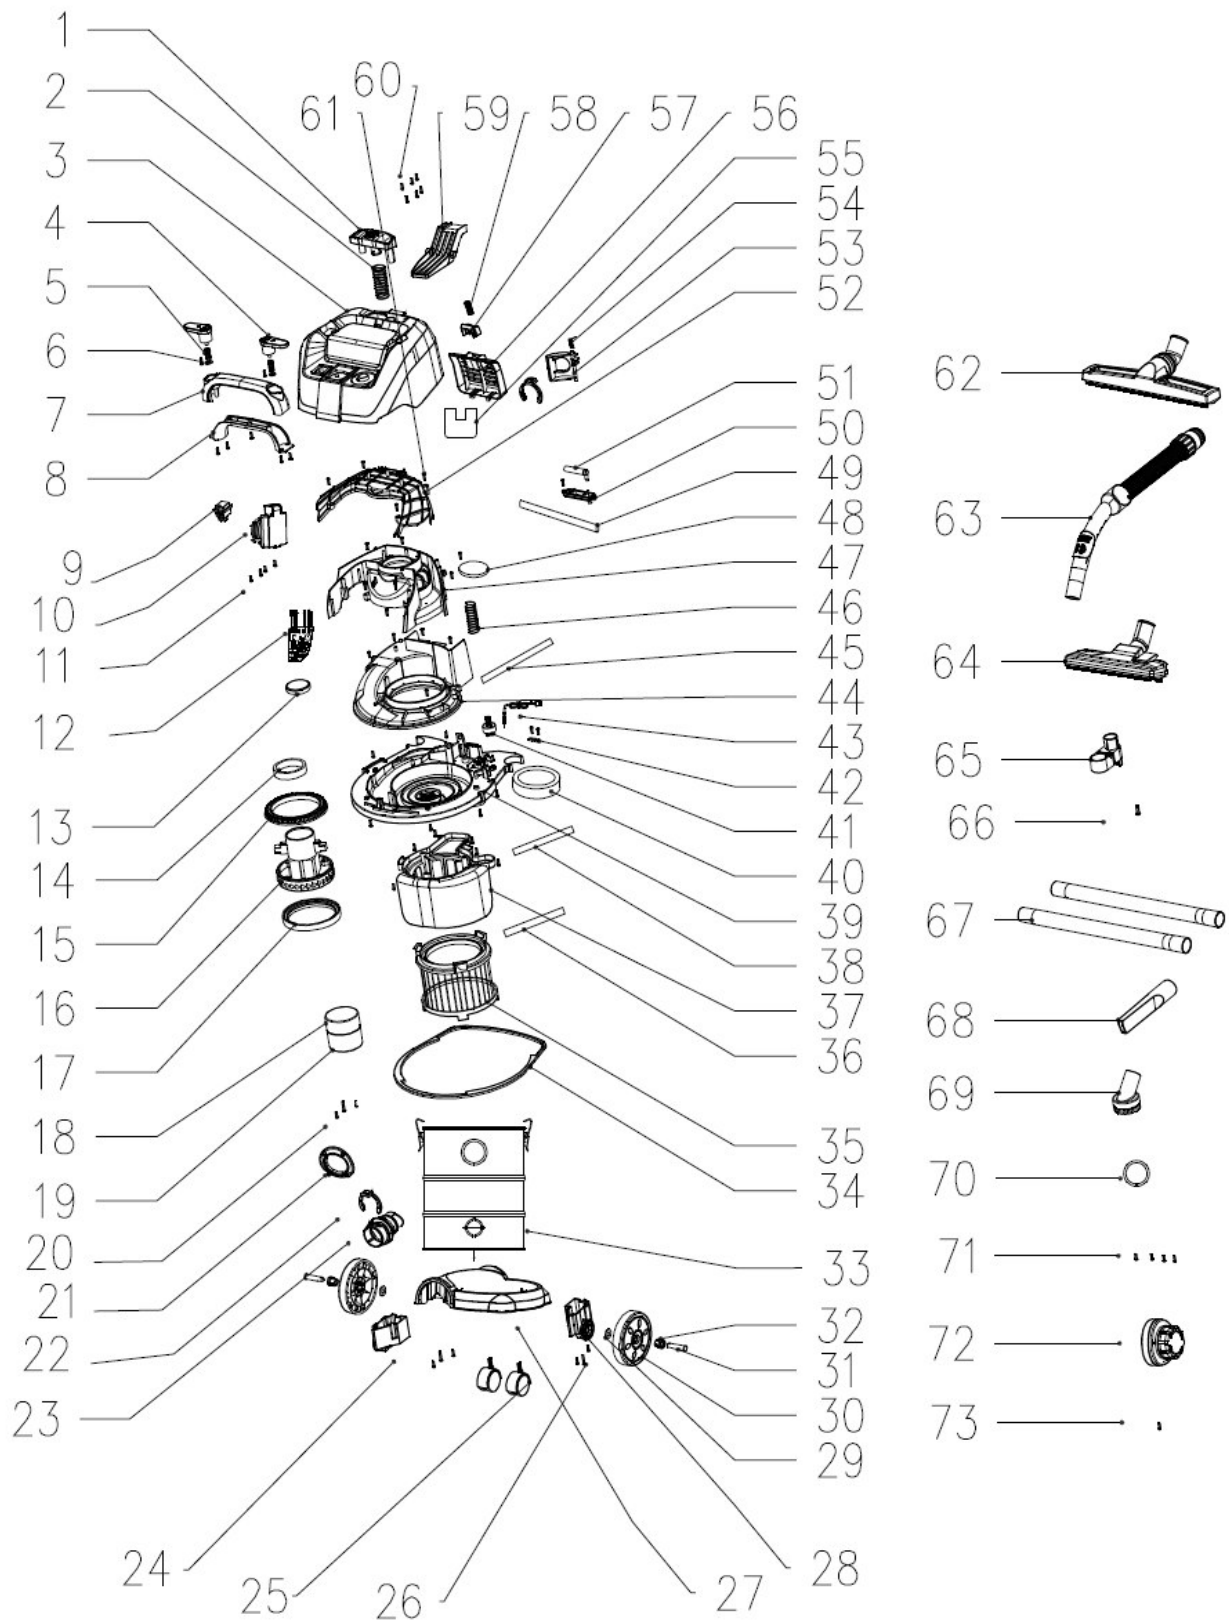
Spare parts drawings of the vacuum cleaner wetCAT 131 IRH
